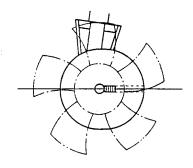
Stop rotating where the screw hole becomes horizontal
